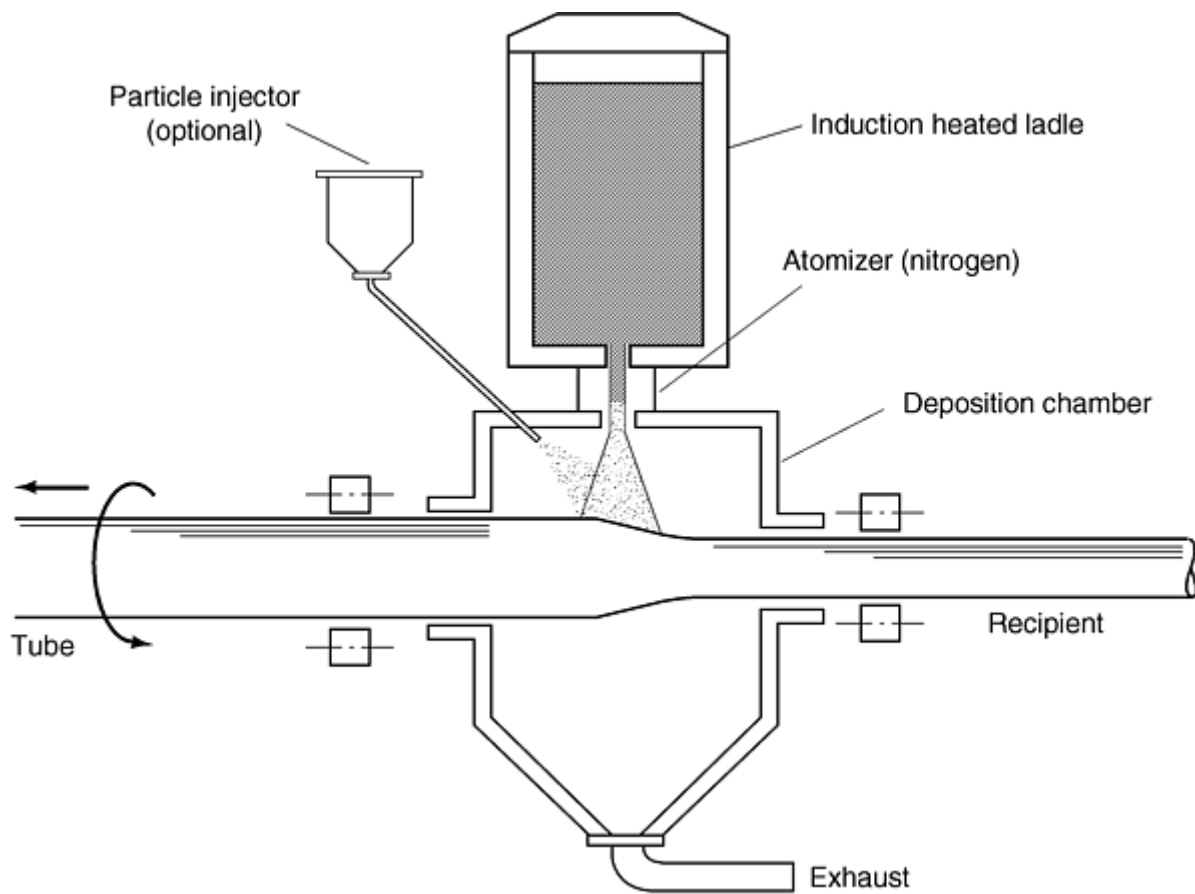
Tube fabrication by spray forming. Source: Osprey Metals, Ltd.
